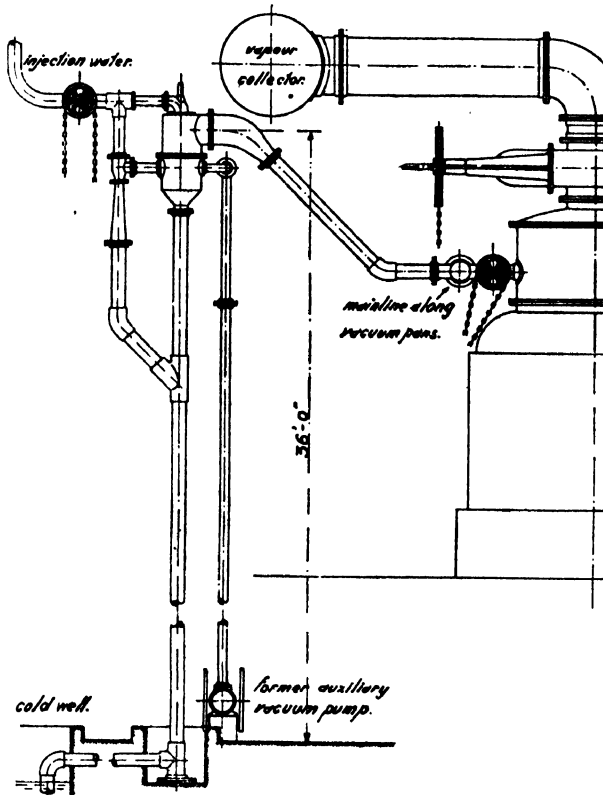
Booster Vacuum Equipment for priming Vacuum Pans.
